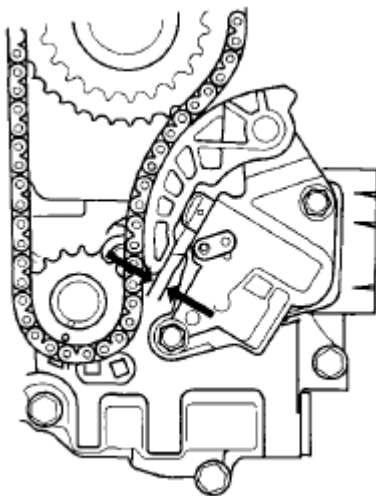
Identifying Oil Pump Chain Auto-Tensioner Rod Length
